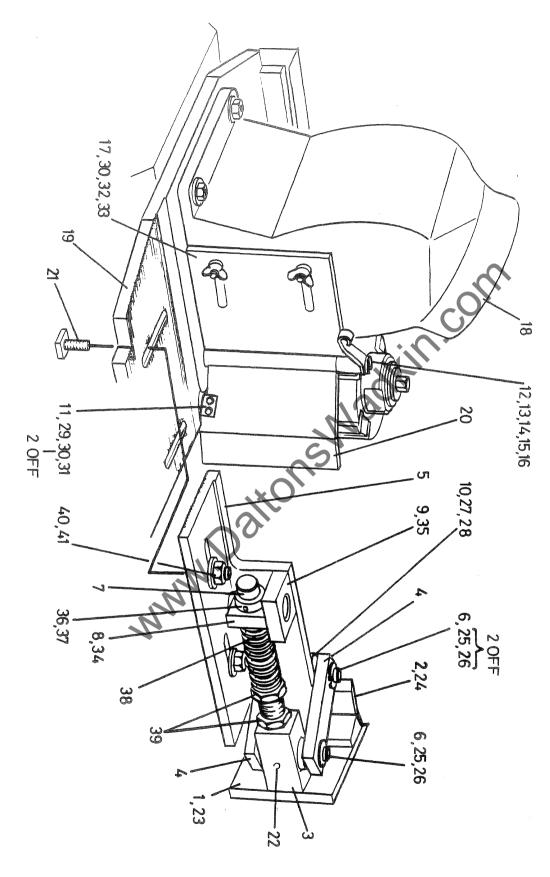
NEARSIDE HEAD CHIPBREAKER MK II
